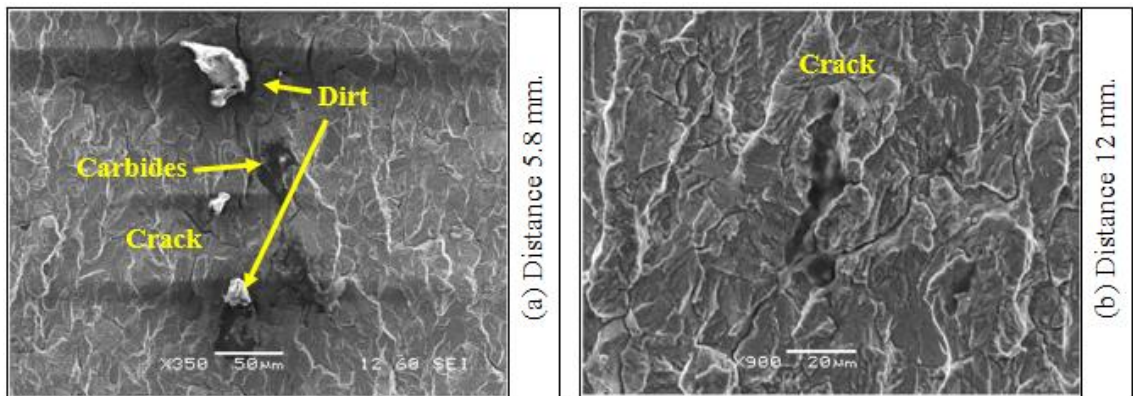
SEM Micrographs show the fracture surface (a) Carbide, dirt, and crack at approximately 5.8 mm (b) Crack at a distance of 12 mm.
